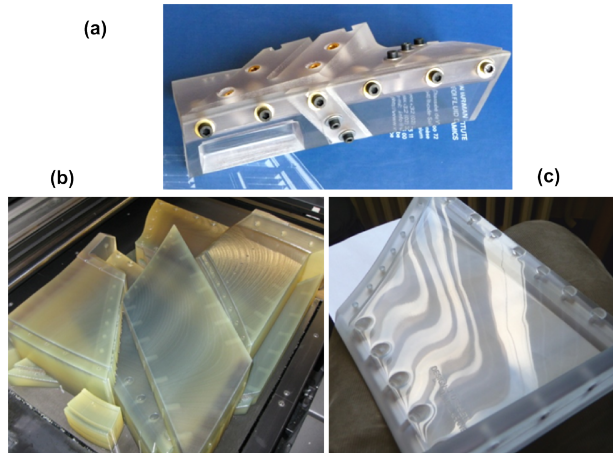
Wall sections (a) Prove of water clear transparency, (b) wall sections without finishing processes, (c) wall section after thermal treatment and polishing
